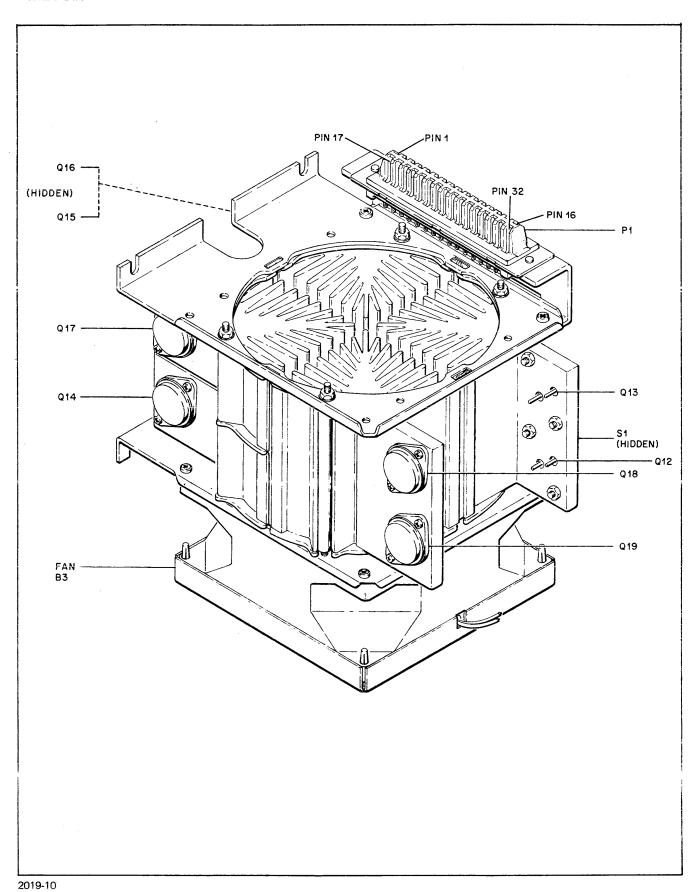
A305 Small Heat Sink Assembly, Parts Location and Connection Diagram (Sheet 2 of 2)
